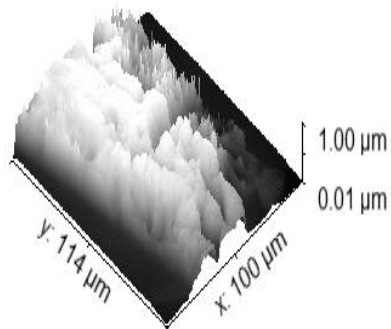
Surface roughness for multi-material printed part on the fractured cross-section as per Table 4.8
